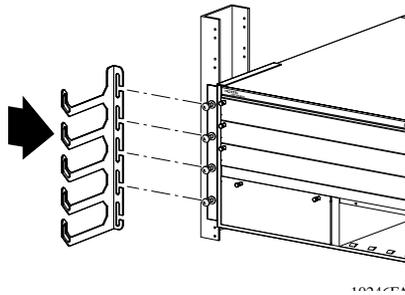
Sliding the cable guide onto the screws: 8003 Chassis
